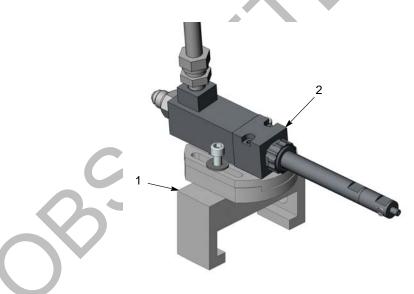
CleanSpray XT Spray Gun and Mounting Bracket
